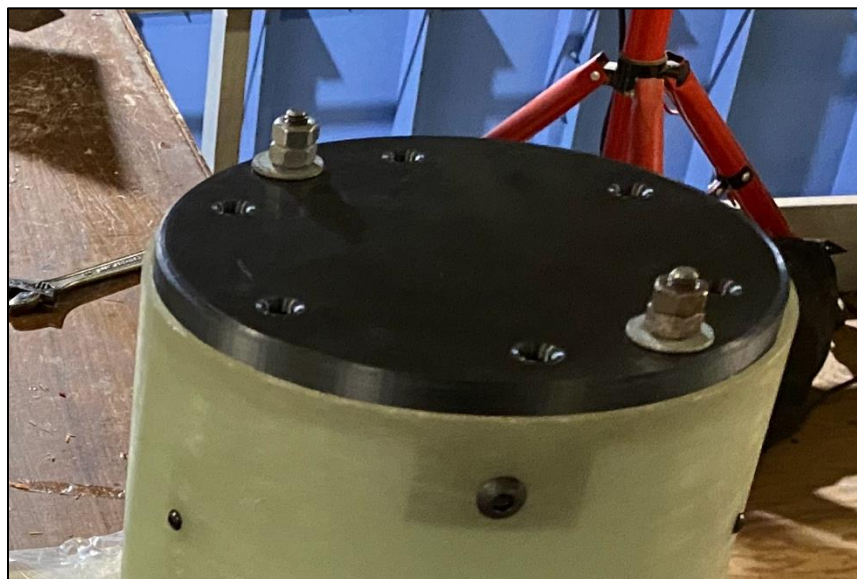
Nosecone Attachment Plate Assembled into R&D
